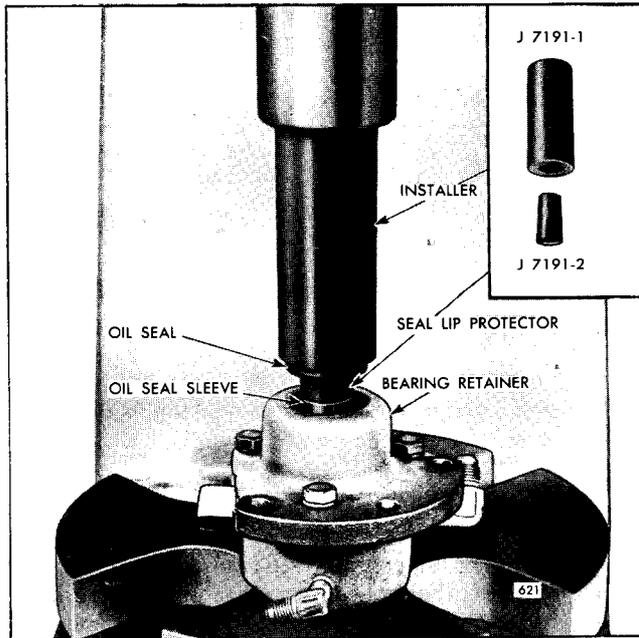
Installing Pump Shaft Oil Seal in Bearing Retainer
